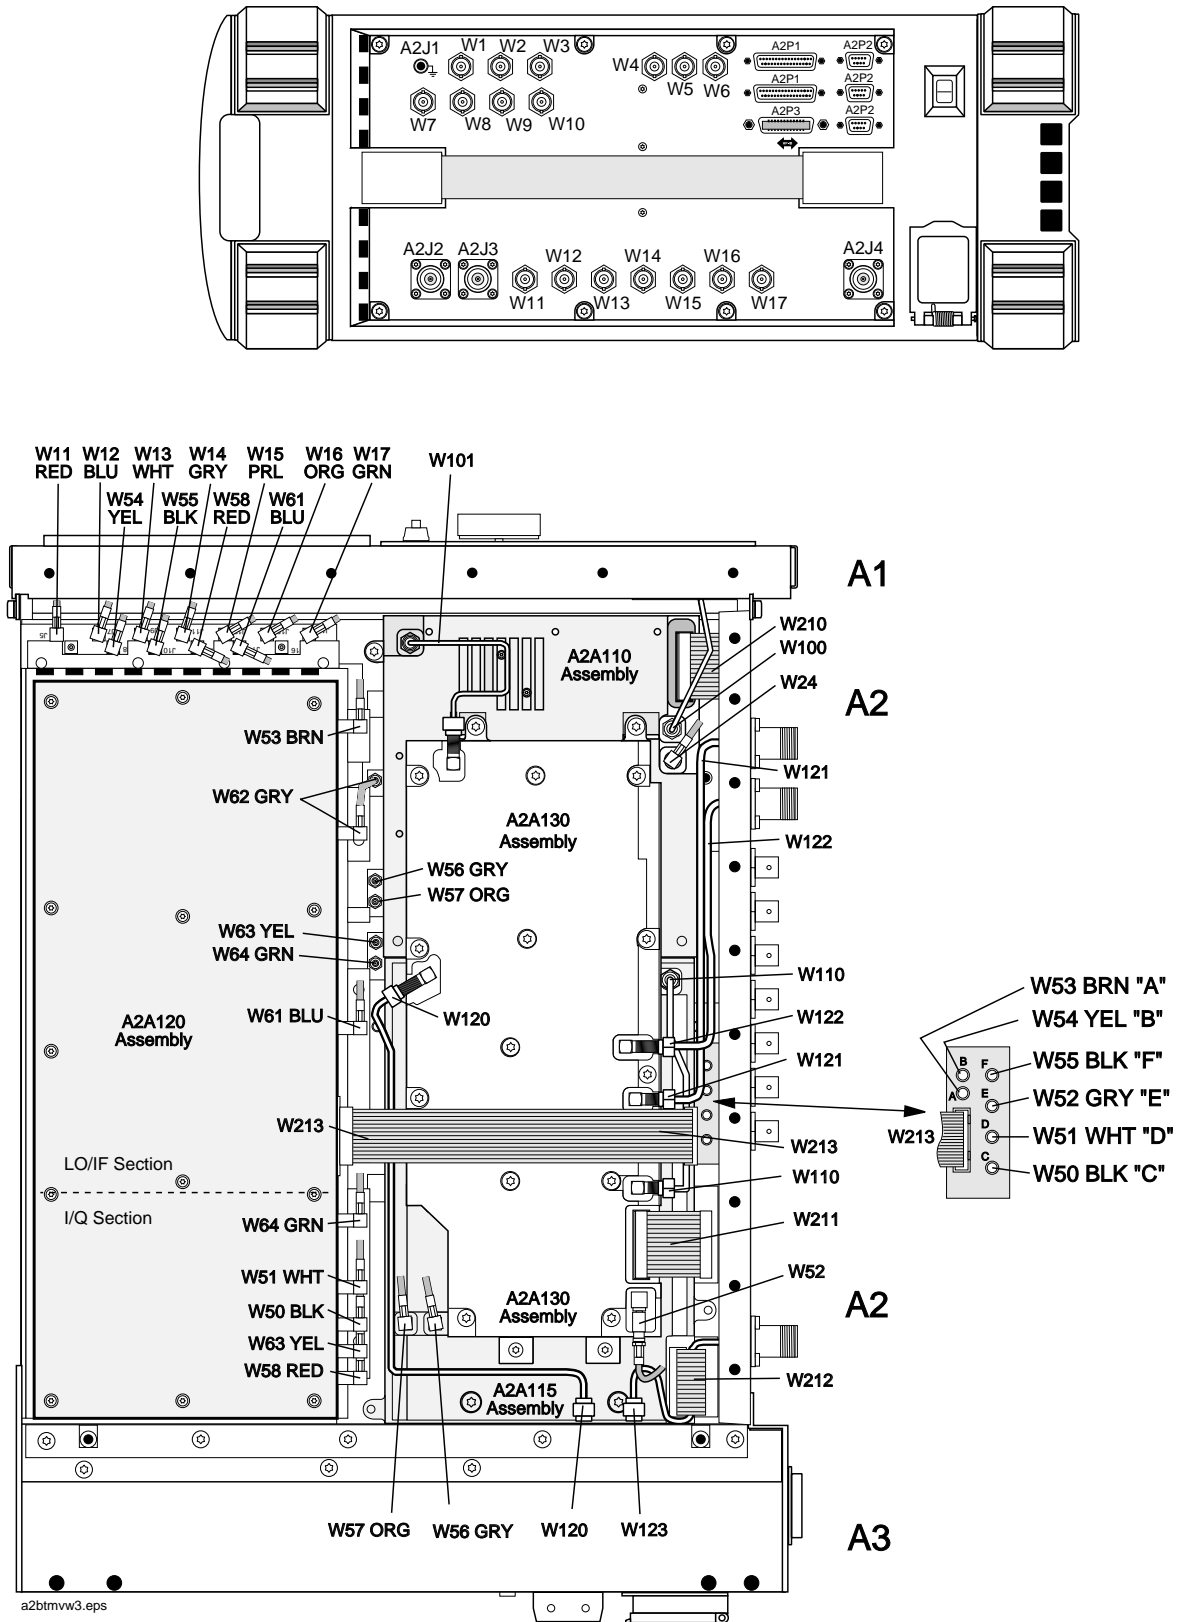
Bottom View of Test Set (without Bottom Cover)
